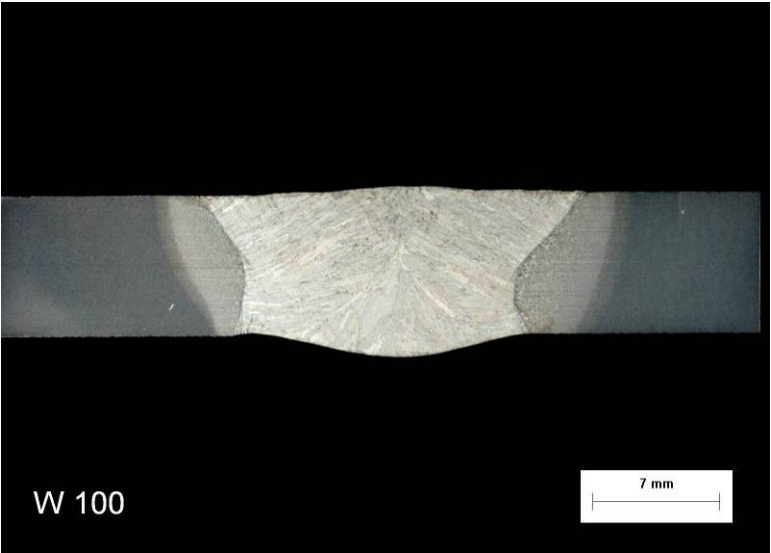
Weld with 8-mm Procedure and 5.0-mm Root Opening
